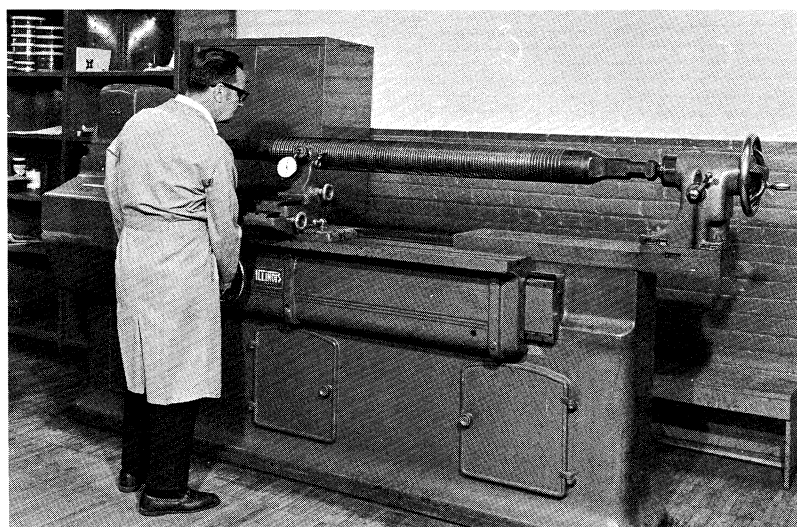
Checking lead on a large Red Ring helical gear broach.
